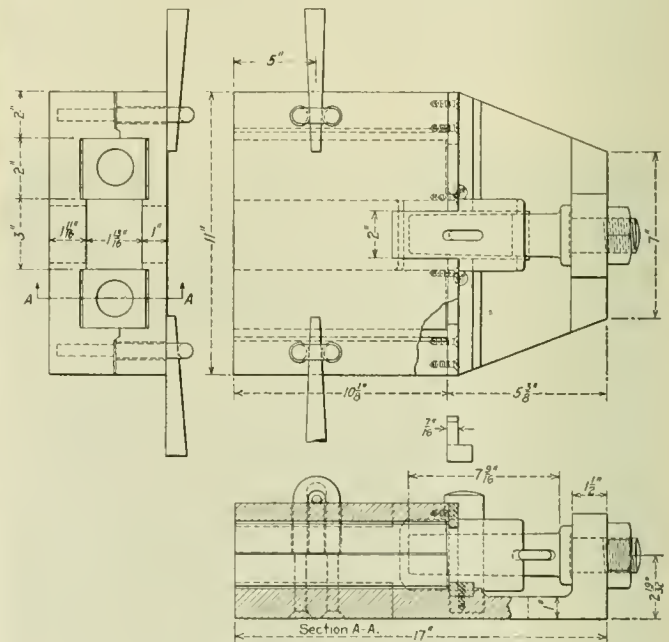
Fixture for Babbitting Valve Stem Crossheads
